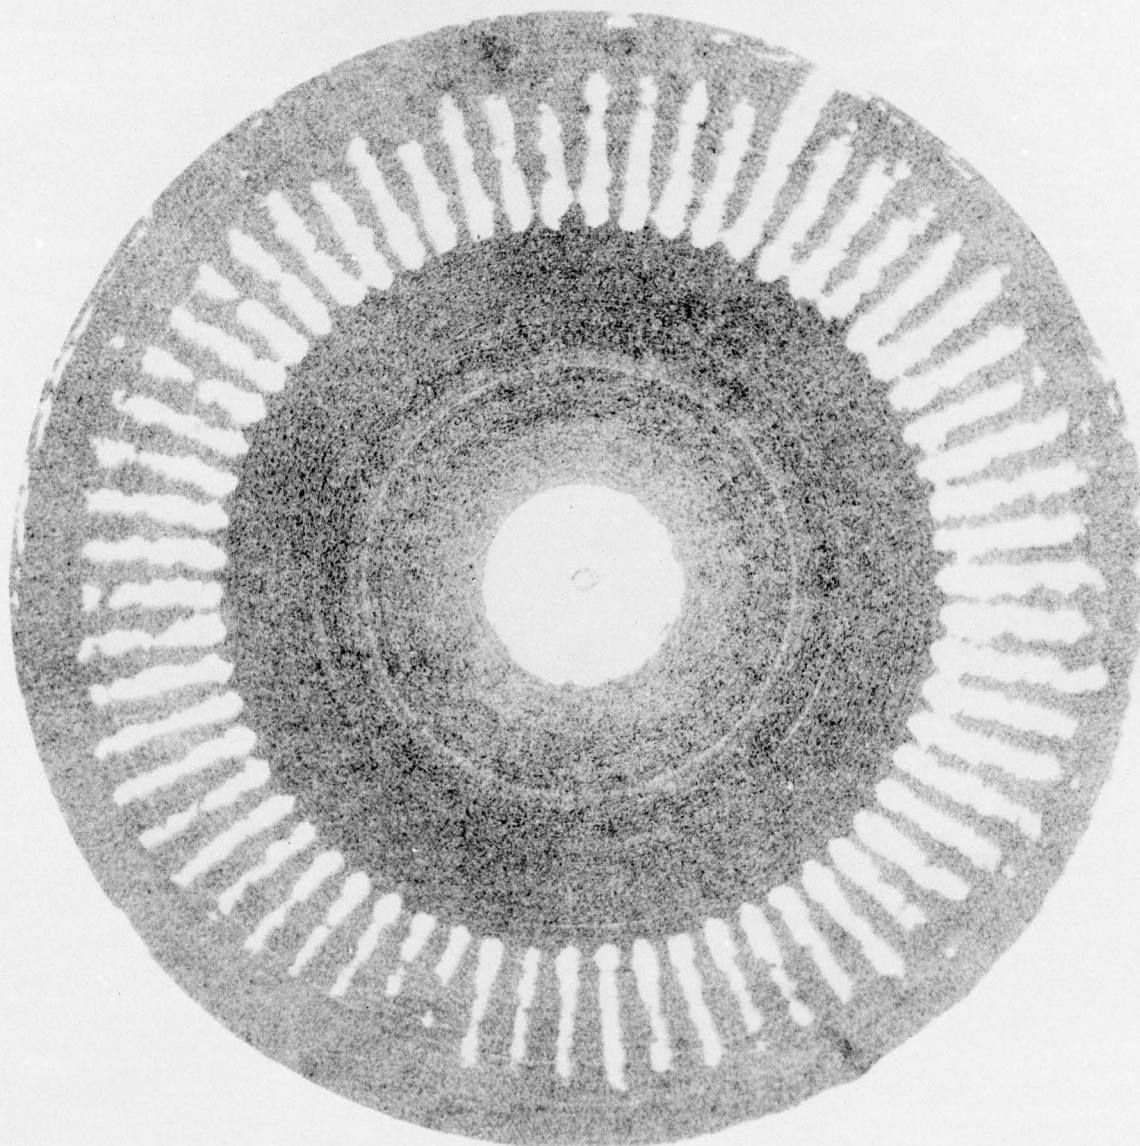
Ultrasonic Inspection Results of the Second Laminated Wheel Blank (Bottom View).
